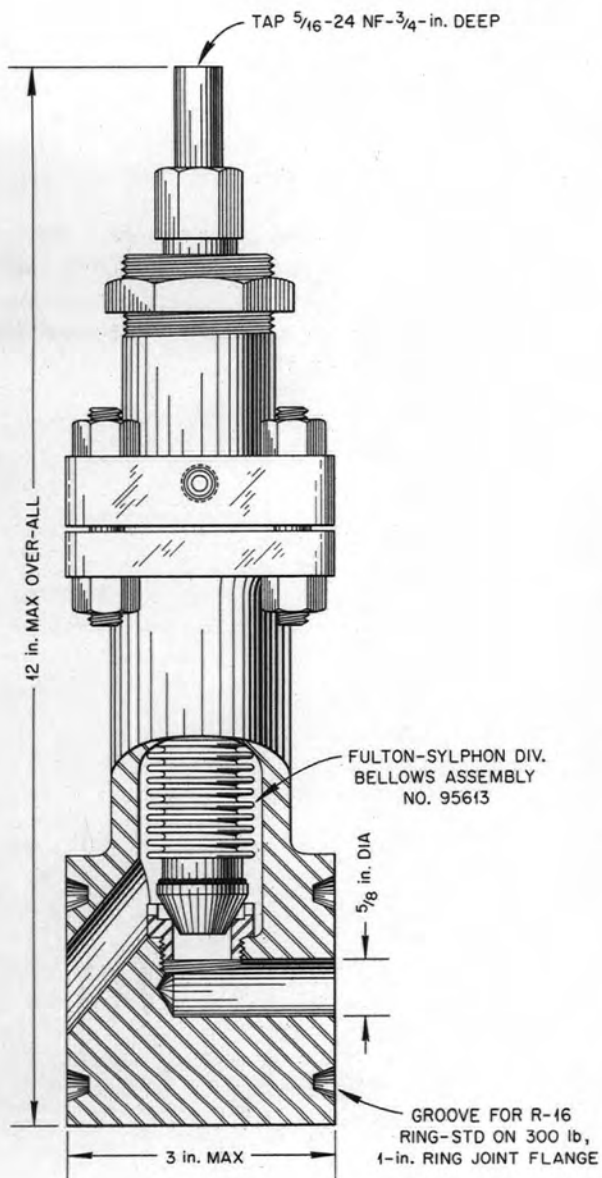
HRT Low-Pressure Control Valve Assembly.
